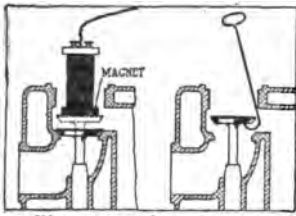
A magnetic valve lifter: Magnets have been used many times for picking up all sorts of iron and steel parts, but their use for pulling out valves is unusual. The magnet shown is approximately  $\frac{3}{4} \times 8$  in. and is capable of exerting a pull of about 7 lbs., and will pull a valve out after springs have been removed.
